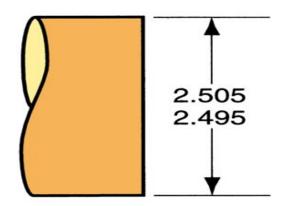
Ways to specify tolerance limits for a nominal dimension of 2.500
